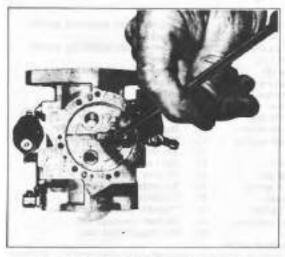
F-7G. Checking Bennamizer Ball Check Valve for Leakage
